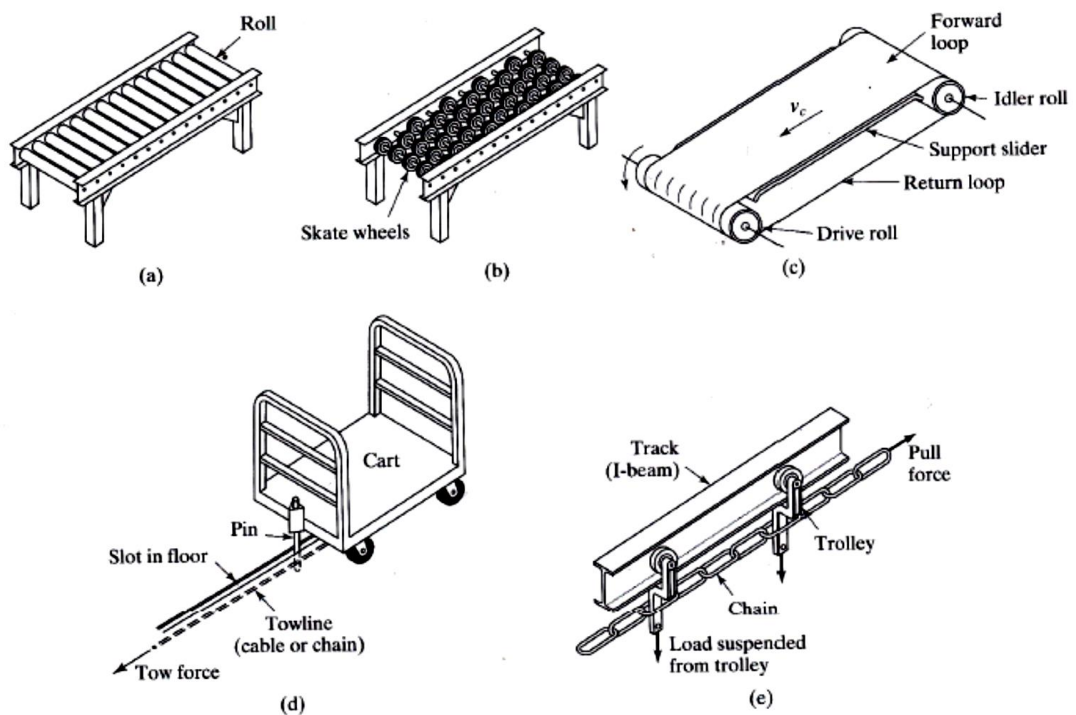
(a) Roller conveyor, (b) skate-wheel conveyor, (c) belt (flat) conveyor (support frame not shown), (d) in-floor towline conveyor, and (e) overhead trolley (Source: Groover M. P., 2008)
